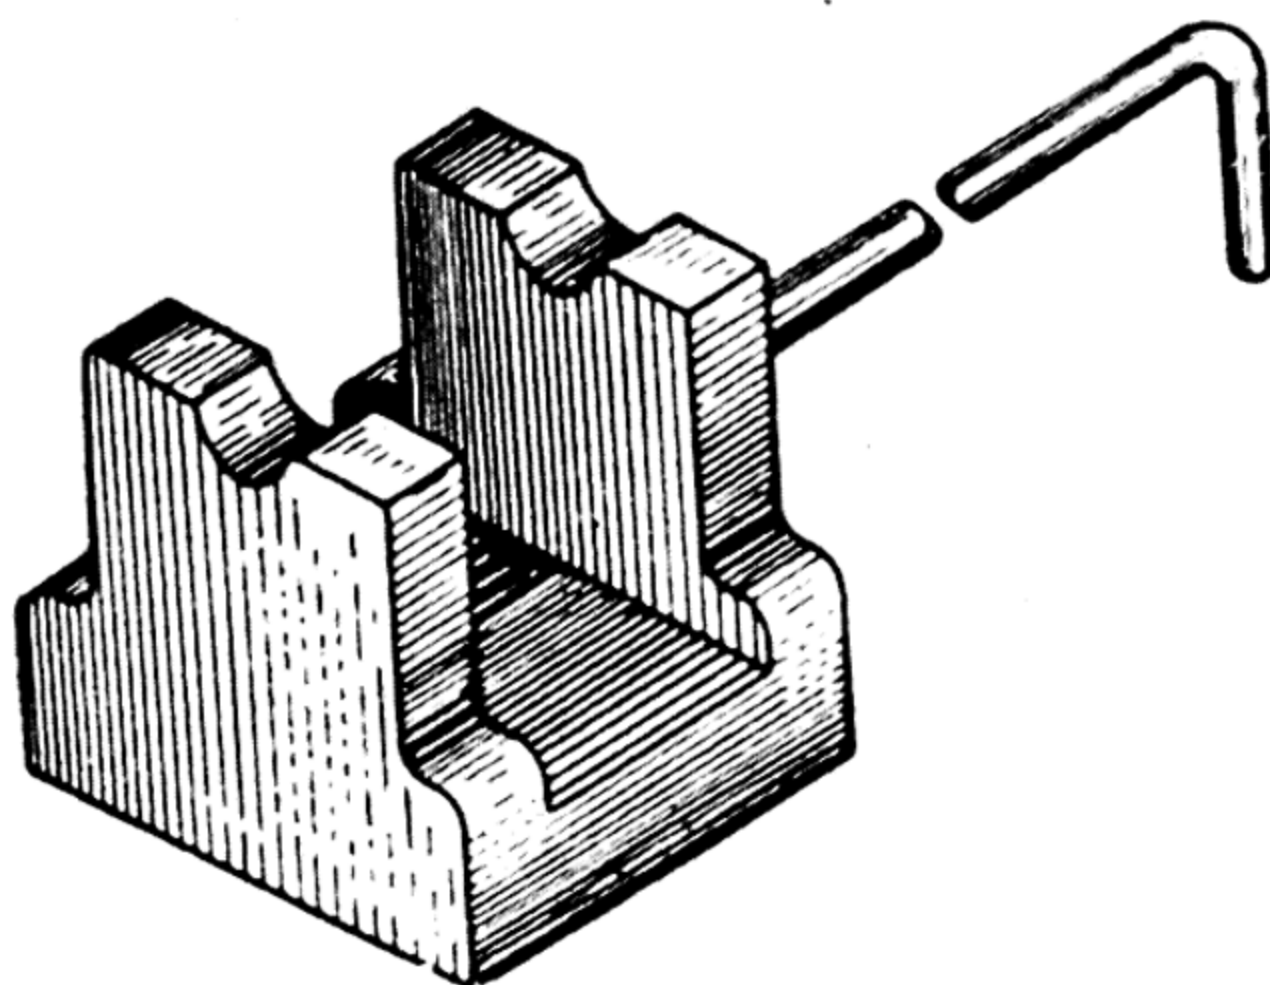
Saddle for rolling rings up to 400 mm in diameter
